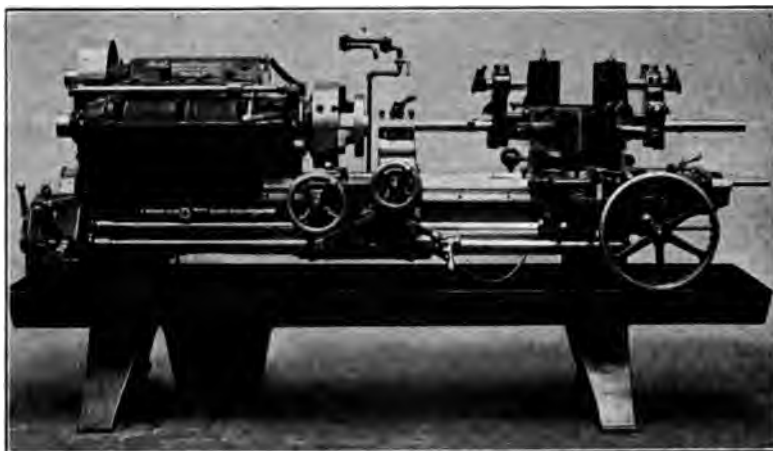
UNIVERSAL HOLLOW HEXAGON TURRET LATHE EXHIBITED BY WARNER AND SWASEY CO.
